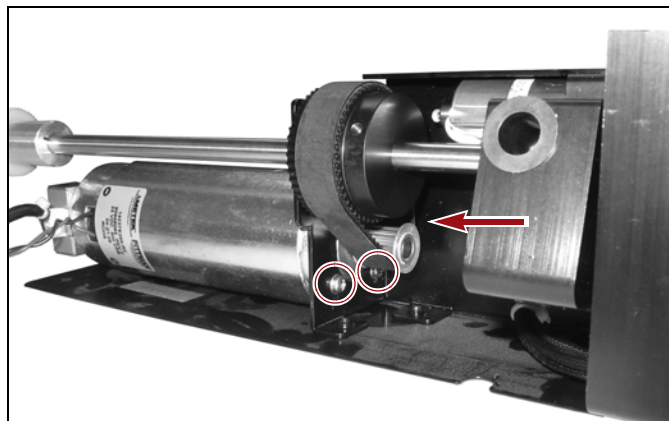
Tighten the HAX motor screws. A third screw, behind the motor shaft, is not visible.
